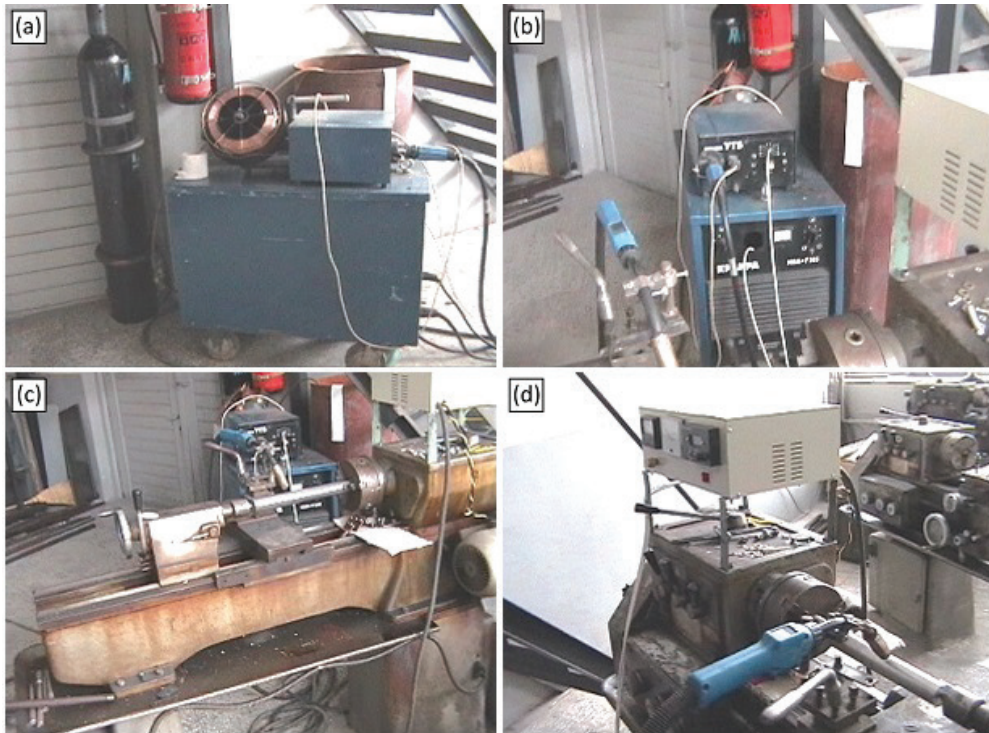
Equipment utilized in the coatings deposition: (a) power supply, (b) wire feeder (YT5), (c) substrate holder (lathe), and (d) device for electronic control of lathe speed and gas torch [9]
